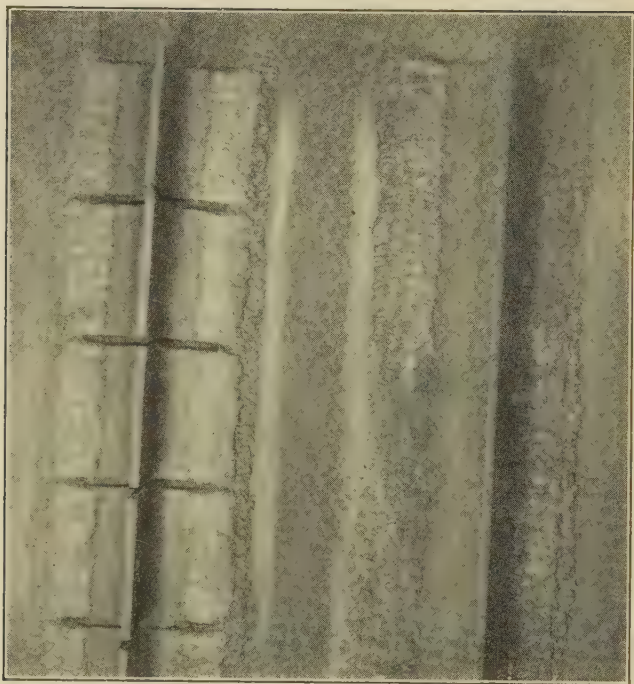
Test No. 2, after completion of welding and before test to destruction.
